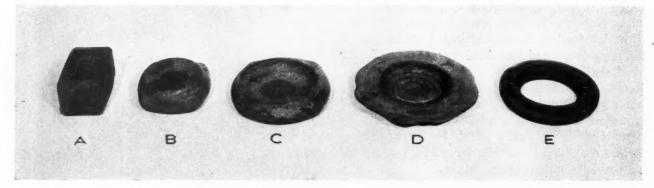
Progressive shapes formed in forging and hot-trimming hypoid driving-gear blanks from billets such as seen at (A)
